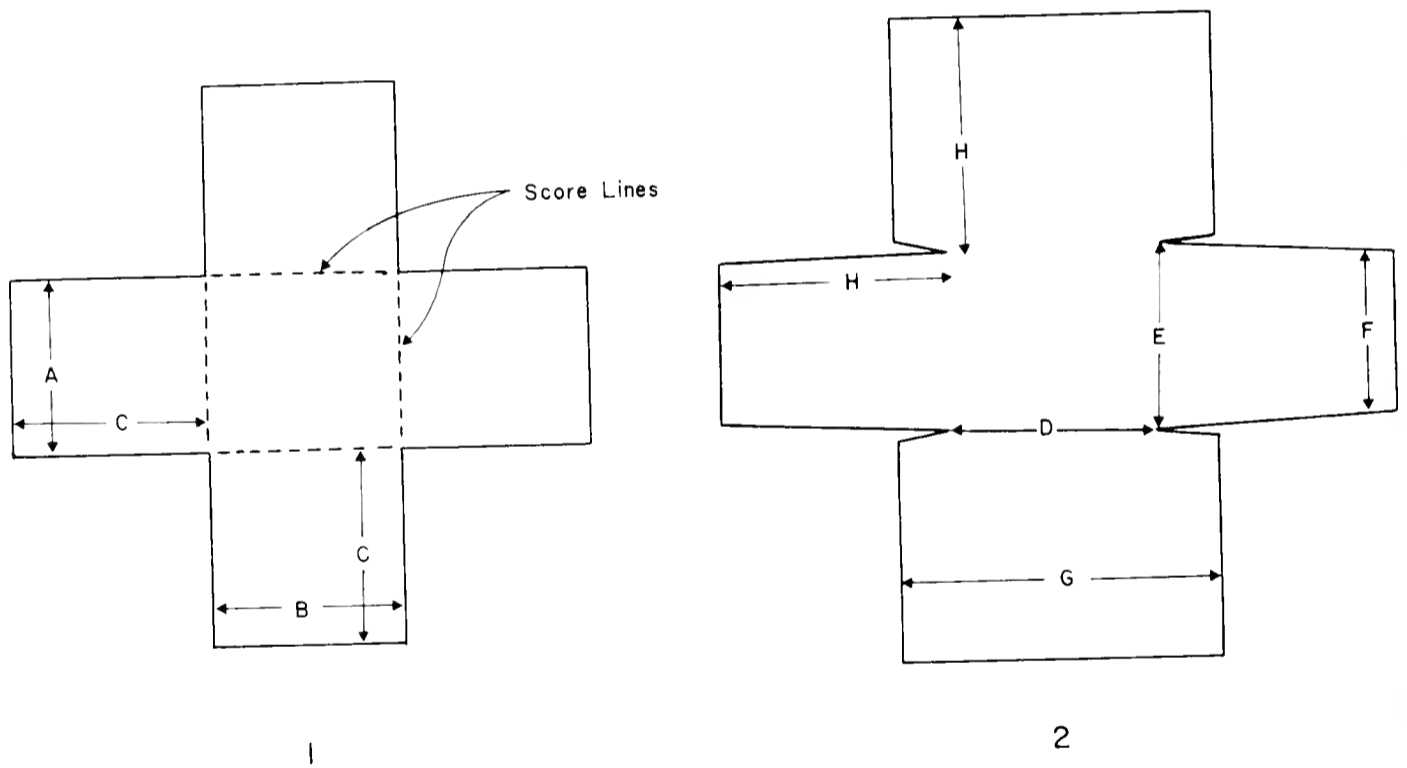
Outline of chipboard box; 2) Outline of cover paper (dimensions given in table).
